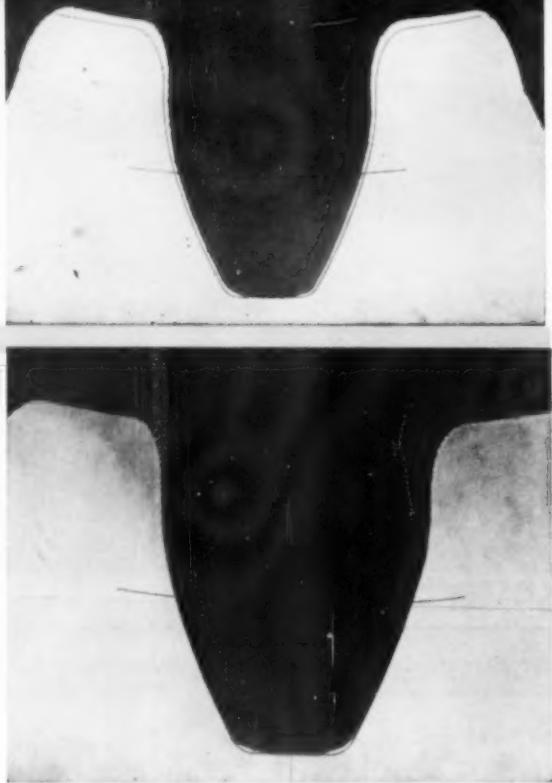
(upper) Profile of a tooth on a gear cut by a hob with a positive rake error.
